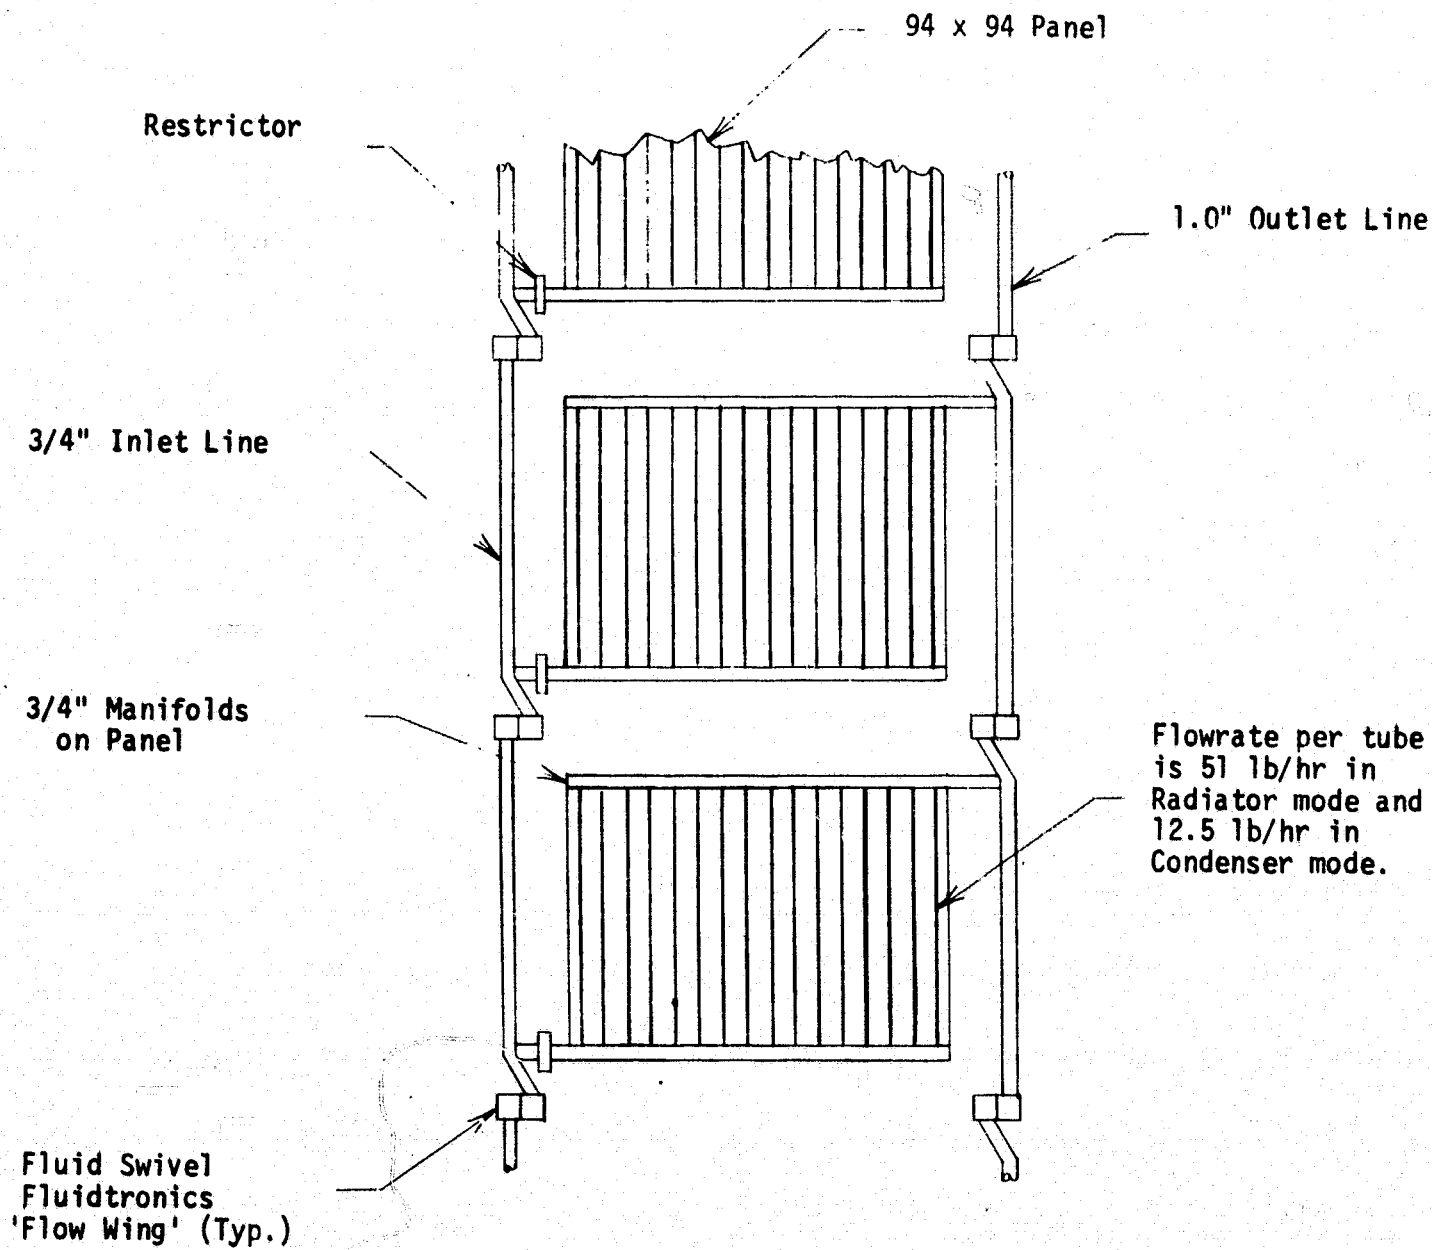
RADIATOR/CONDENSER TUBE AND MANIFOLD LAYOUT
